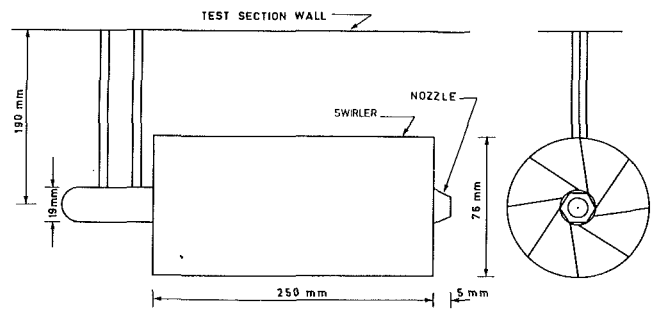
Schematic of the swirl vane assembly fitted to the liquid supply tube of the atomizer inside the wind tunnel test section
